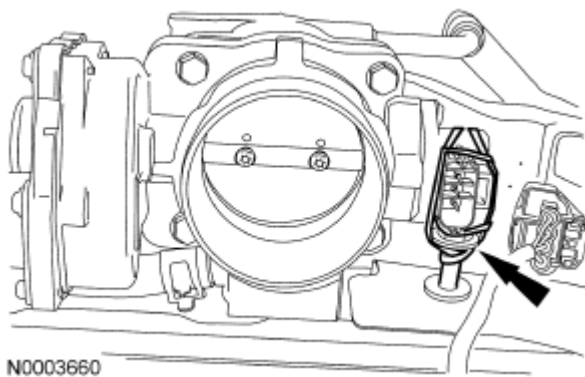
Locating Intake Manifold Crash Bracket With Tie Strap
